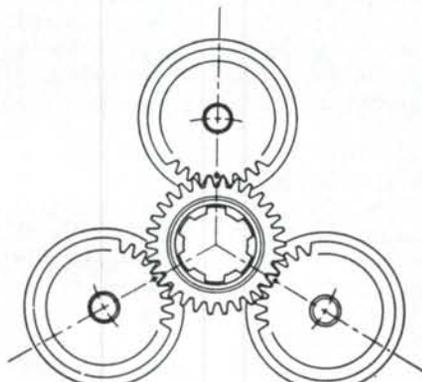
Planet gears must be timed as shown with punch marked tooth of each gear pointing towards center of sun gear.
